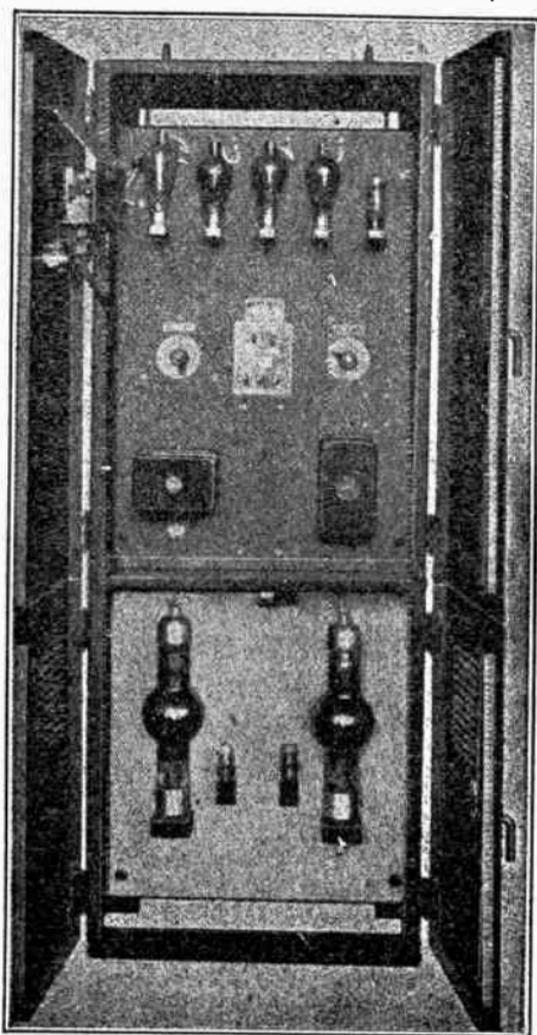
Front view of control panel for electron tube, spot and line welder (Courtesy General Electric Co.)
